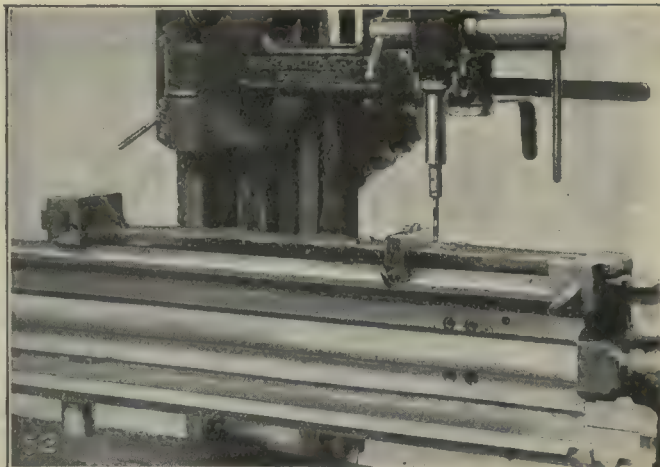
LOCATING SIDE HOLES FROM TRUNNION
